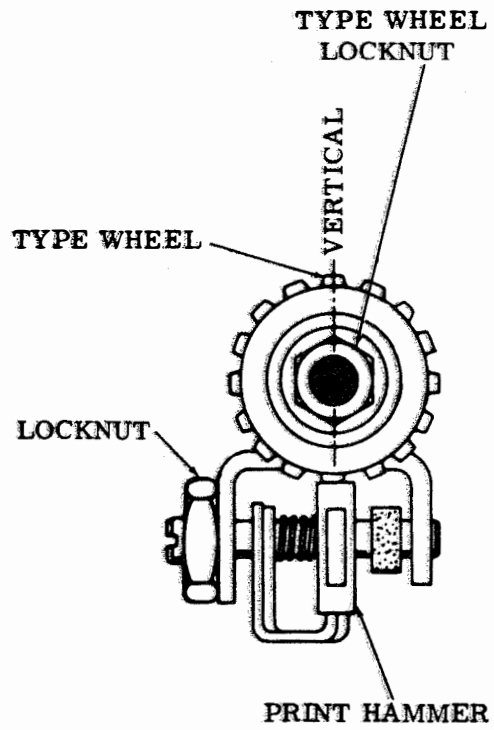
Print Hammer (For Chadless Tape), Front View
